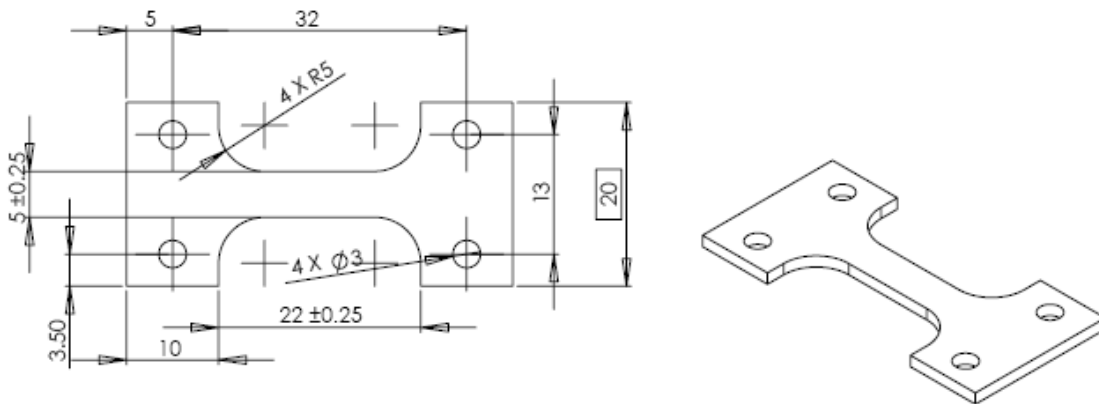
Detailed drawing of specimen with dimensions in mm.
